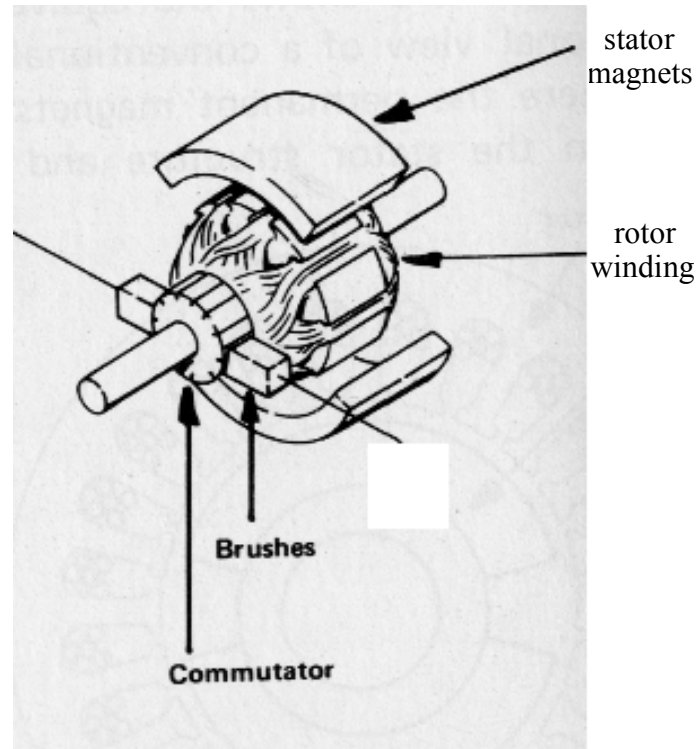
Exploded view of a dc motor; source: Engineering Handbook by Electro-Craft Corp.
